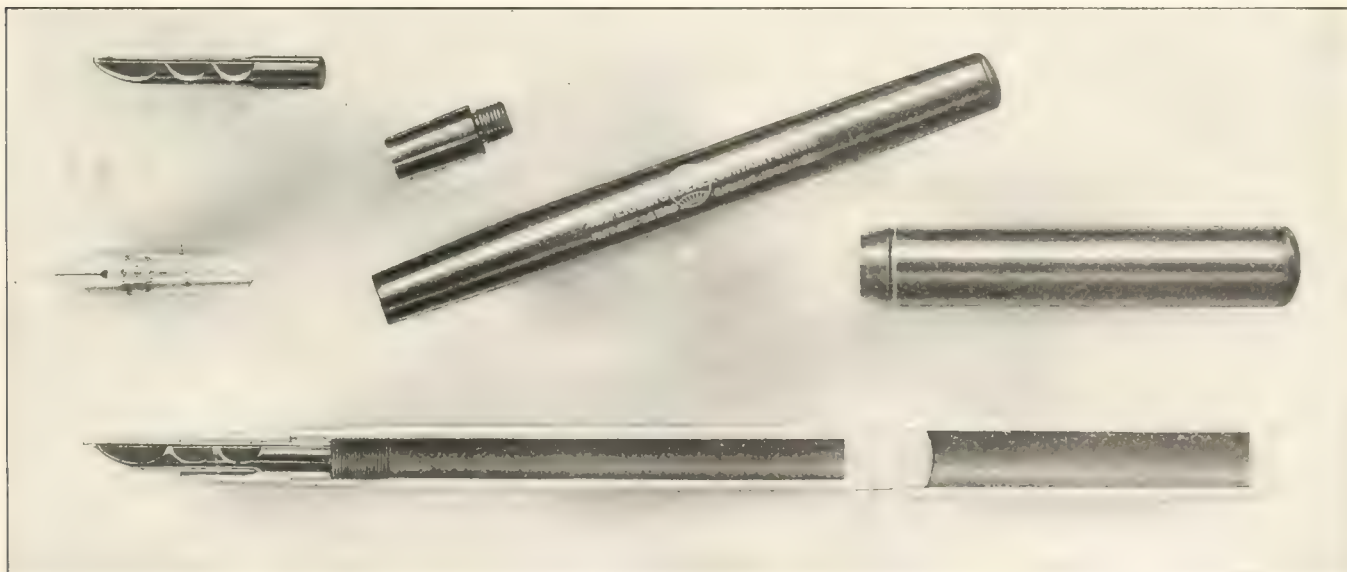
COMPONENT PARTS OF THE FOUNTAIN PEN. A IS THE CAP, B, THE BARREL, C, THE PEN SECTION; D, THE "SPOON" FEED; E, THE PEN POINT; AND F, A SECTIONAL VIEW OF THE ASSEMBLED PARTS.
